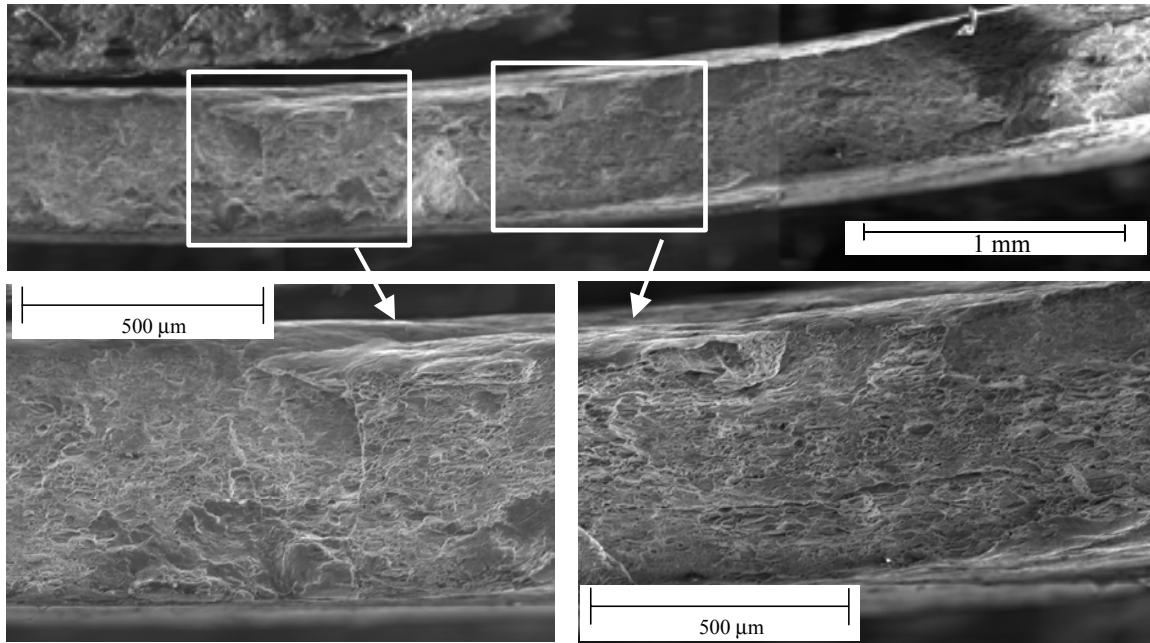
Fracture surface of a free-formed AA5754.
